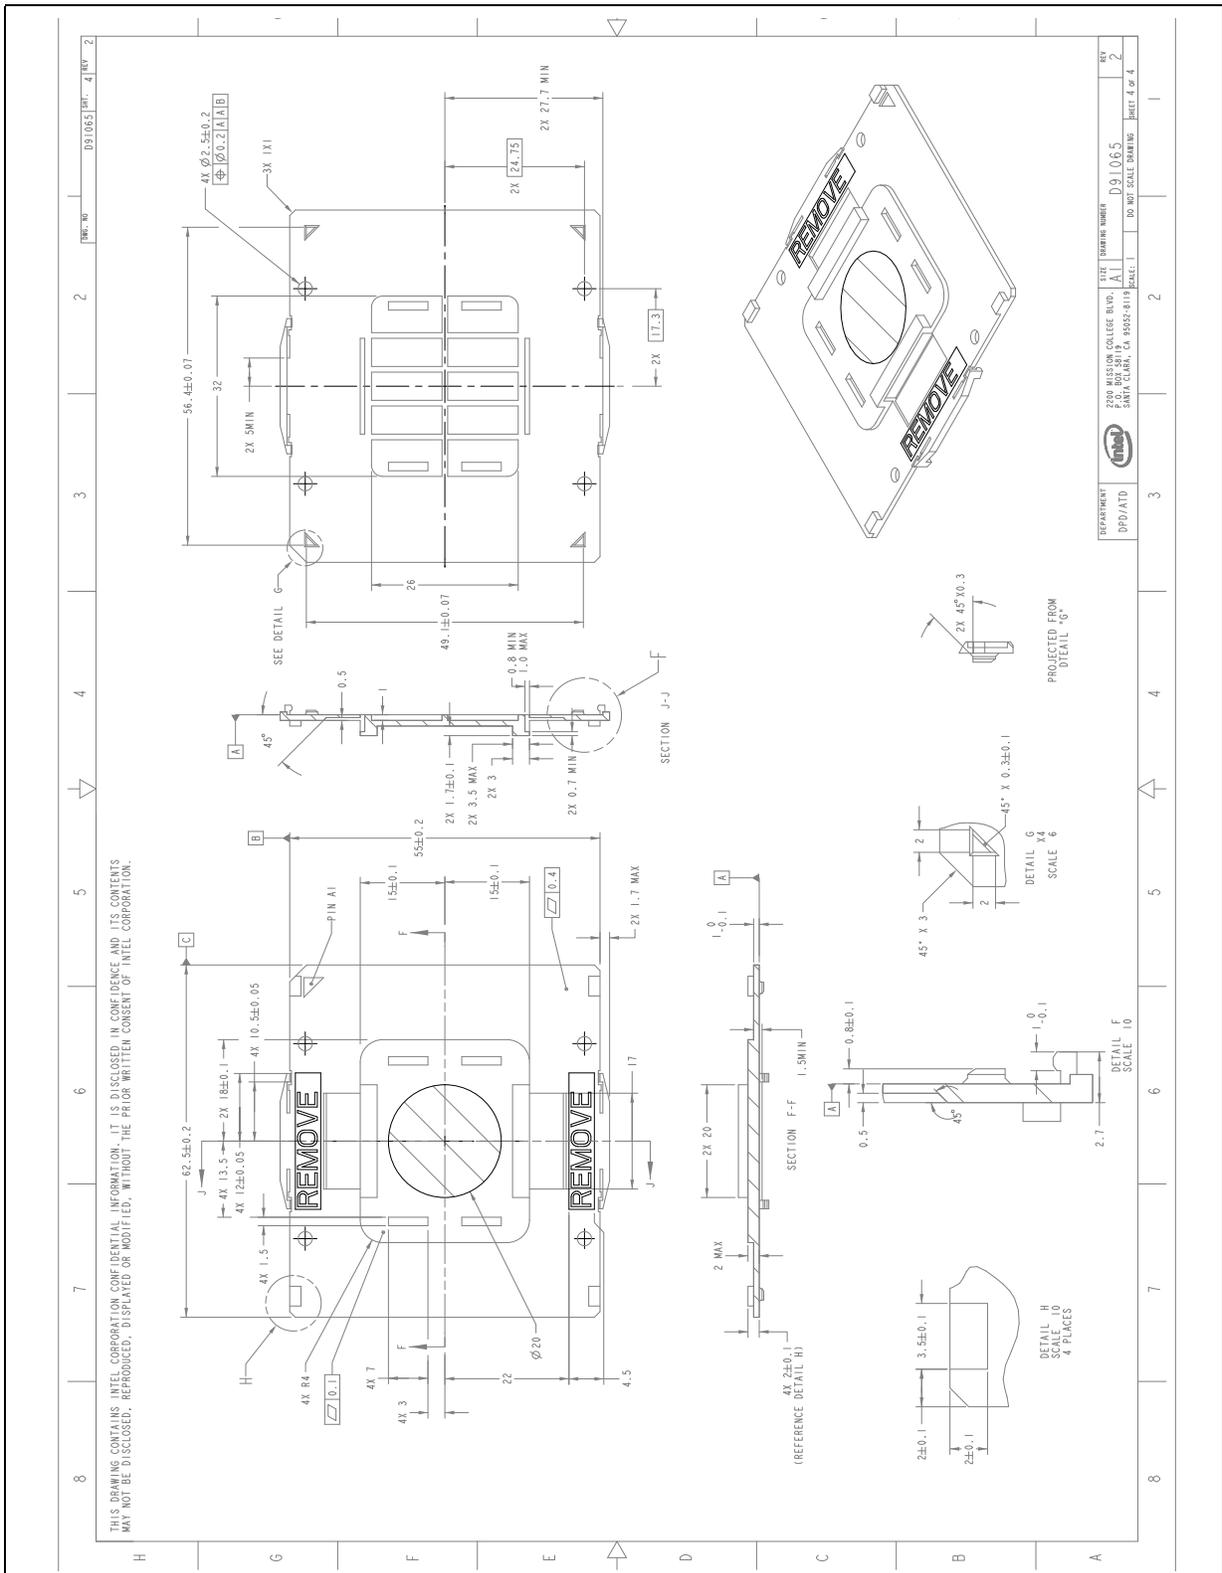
LGA 1567 Socket Mechanical Drawing – Sheet 4 of 4
